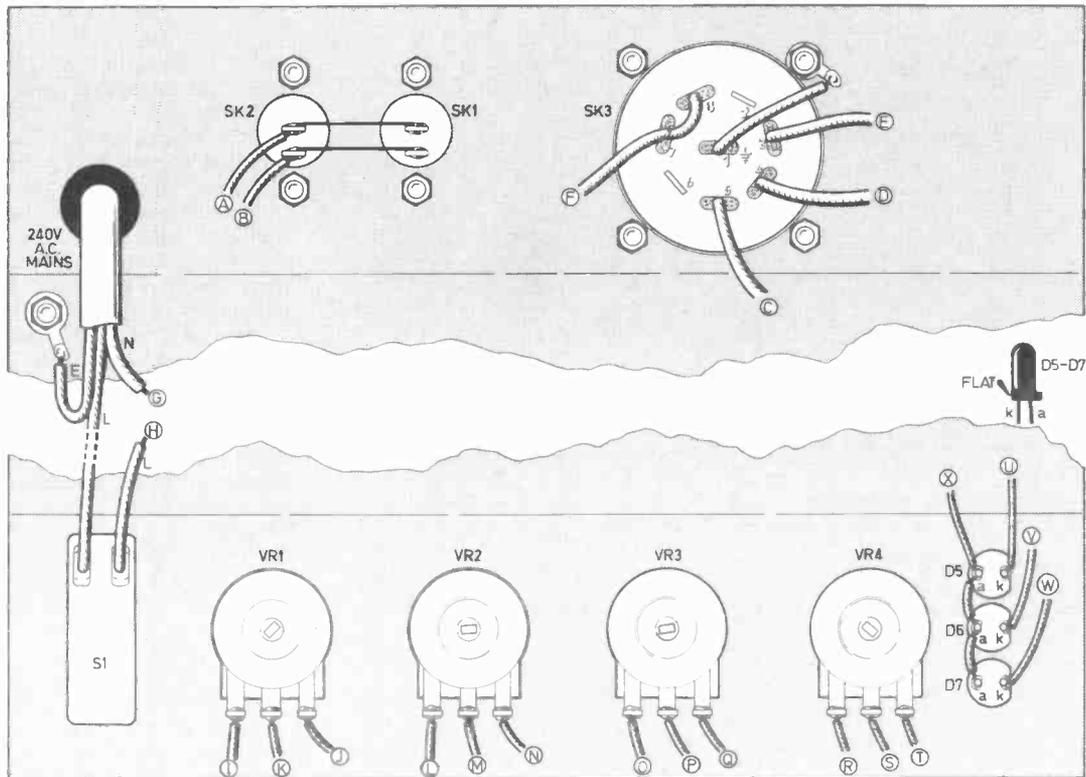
Drawing above shows connections to off-board components. All mains wiring must be with 10A mains cable. Drawing below shows circuit board layout. Note that the anode connection to the thyristors is via the mounting tag. The centre pin connection has been snipped off.
